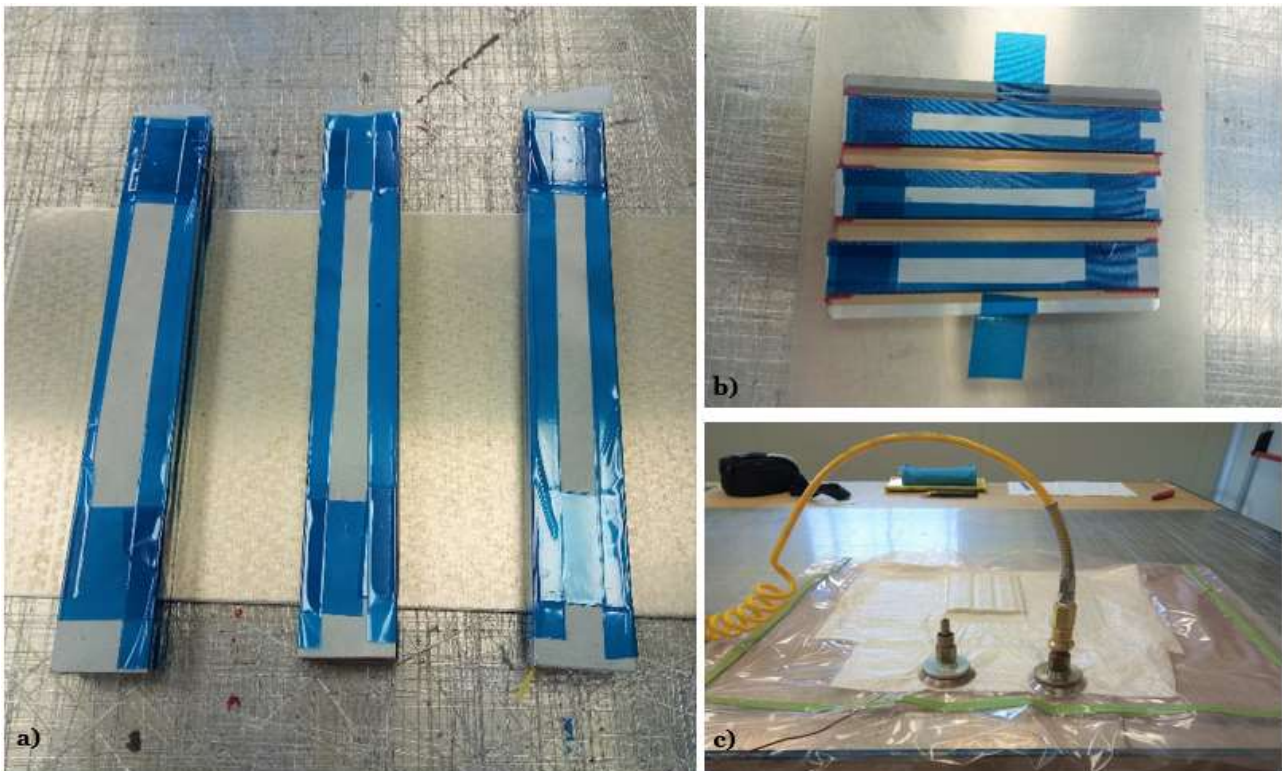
DCB specimens' preparation: a) assembled tapered specimens, b) pack creation for vacuum bag, c) closed vacuum bag and air sucking.
